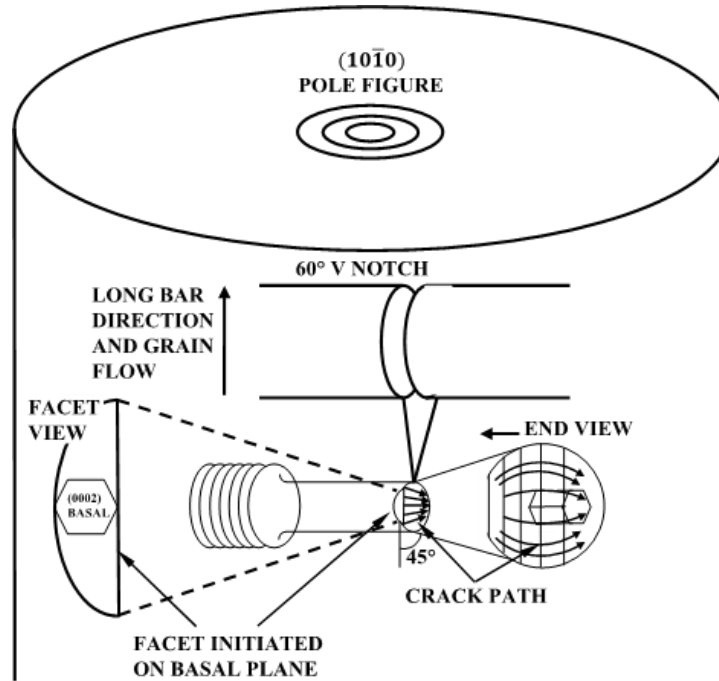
Schematic fracture mechanism for sustained load cracking of 60° V-notch specimen
